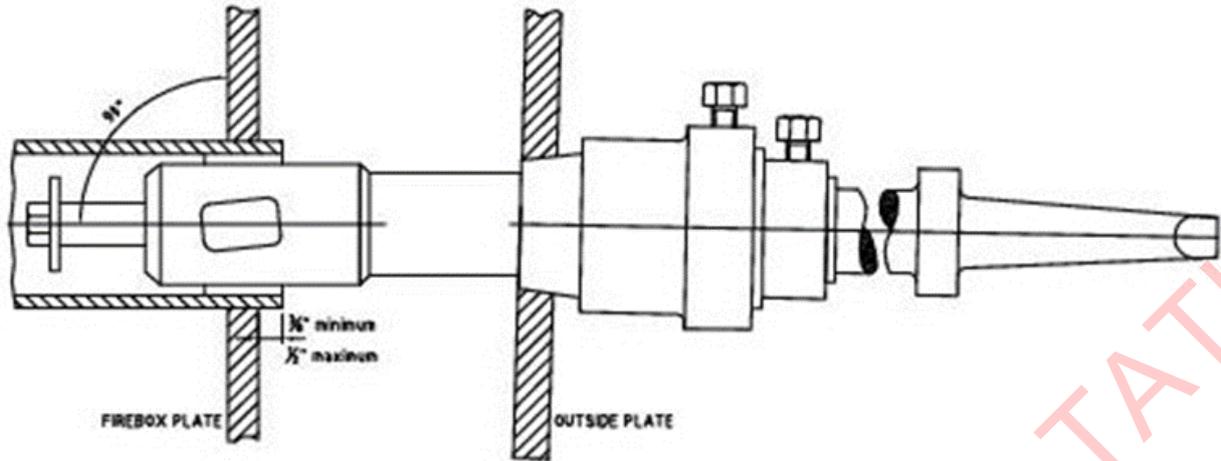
Expanding arch tubes in firebox plates with roller tube expander
